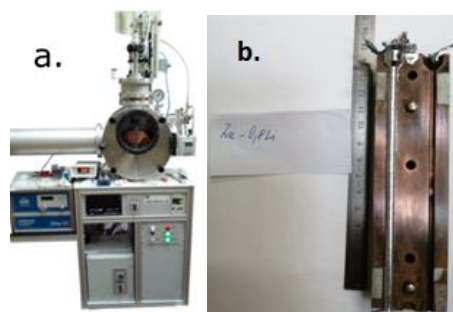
a. equipment - Melt spinner SC, version with the possibility of low pressure die casting of the melt into a cooled Cu mold, b. cast \varnothing 5 mm and length 130 mm inside a copper mold
